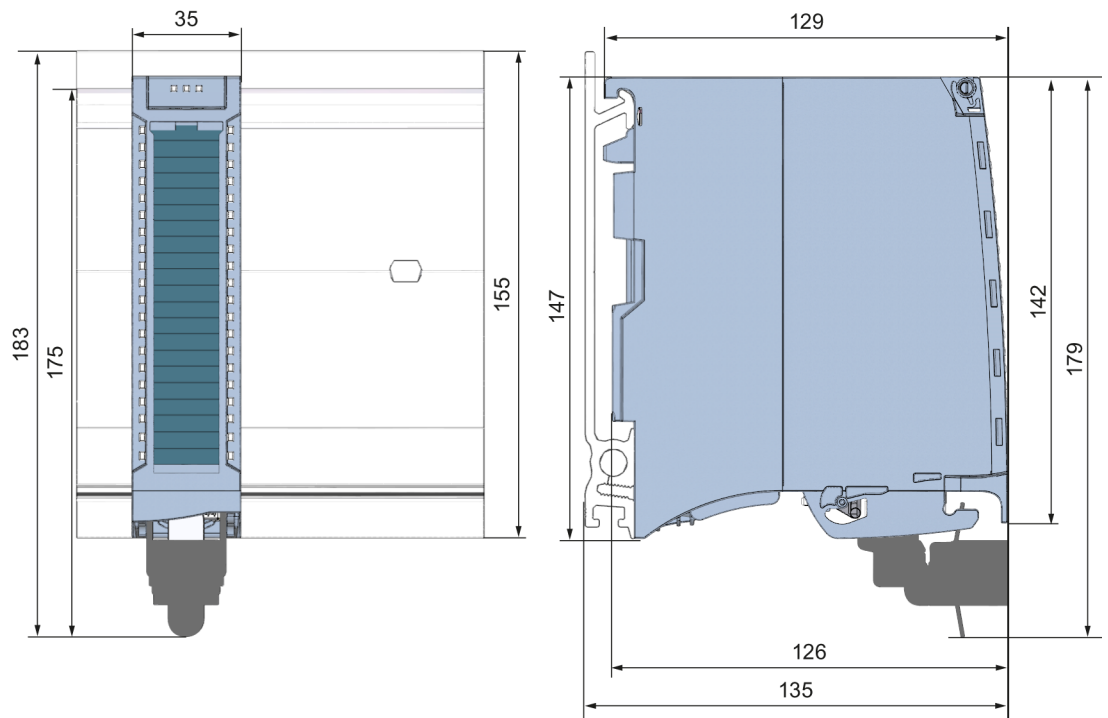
Dimensional drawing of the AI 8xU//RTD/TC ST module
